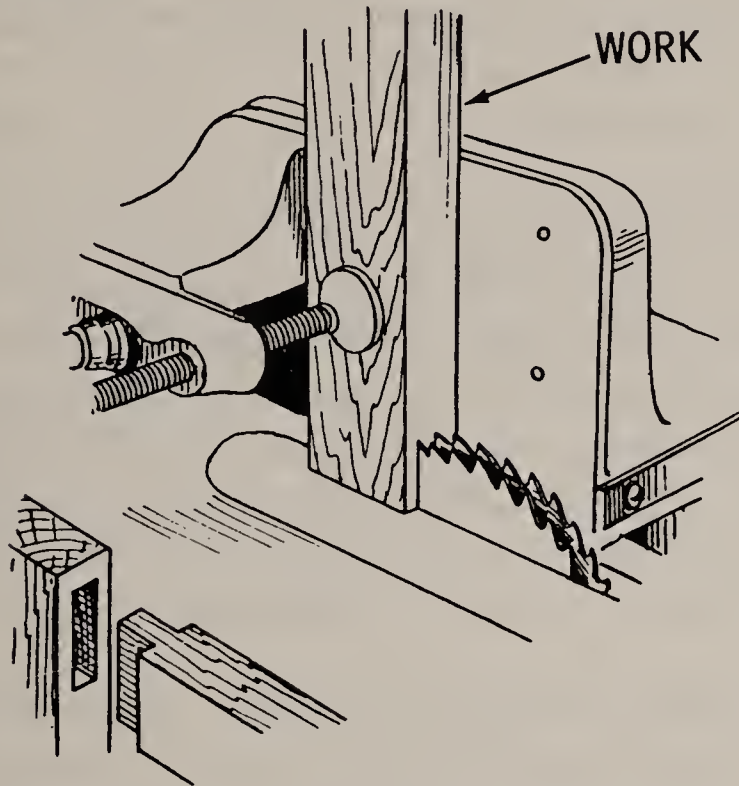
Making cheek cuts with two saw blades and spacing collar.
